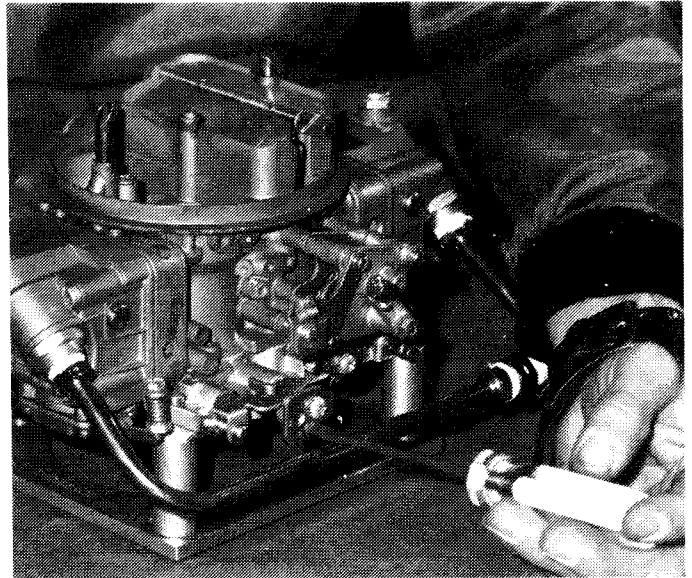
Accelerator pump cams are held in place with this screw. Pump lever should operate instantly with the slightest throttle rotation when cam is properly installed.
